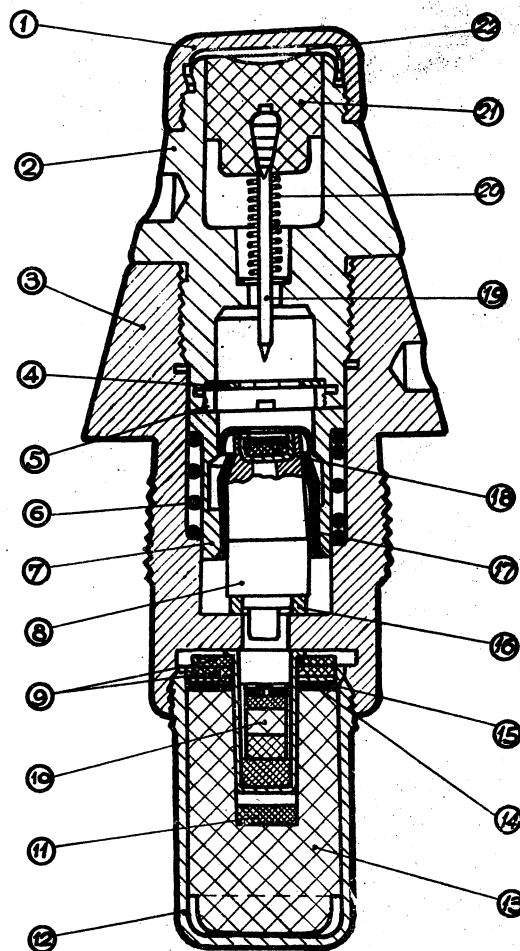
FUZE PD »KTM-1« DESIGNED FOR HIH EXPLOSIVE SHELL »HE-OF-350«
